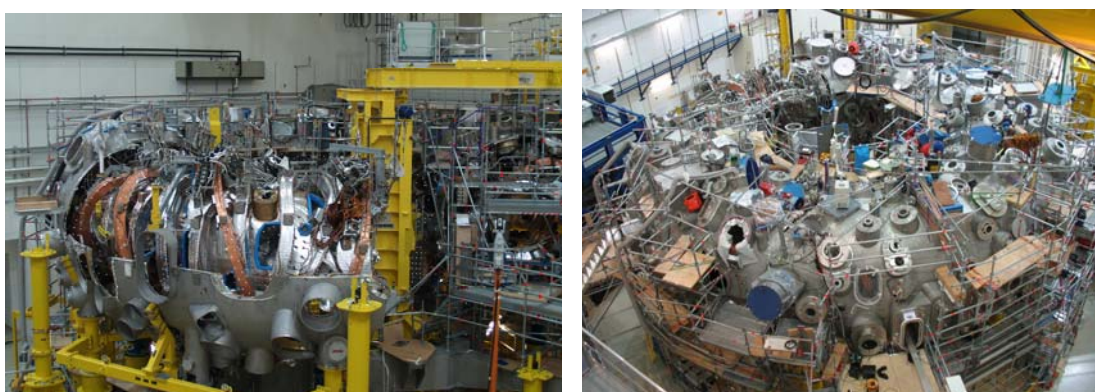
December 2010 - three modules placed at the W7-X ring (left); December 2011 five modules in place (right)
